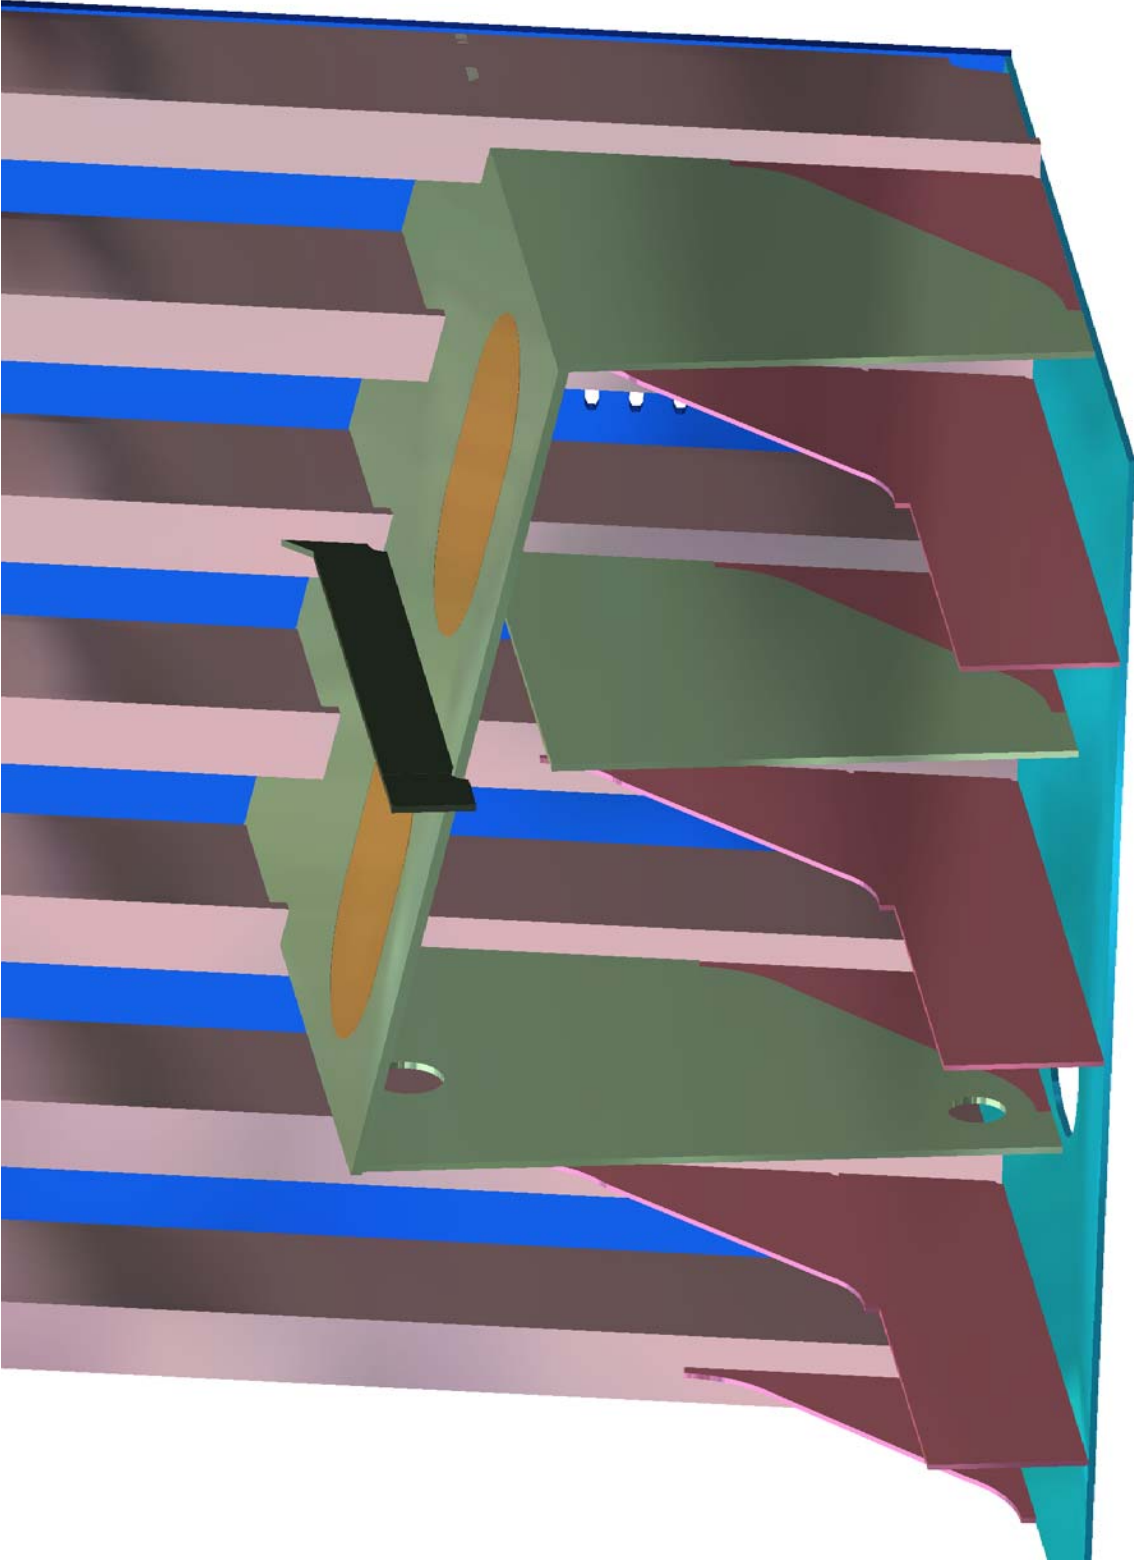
Seachest Looking Outboard and Aft with Inboard Plate Removed
